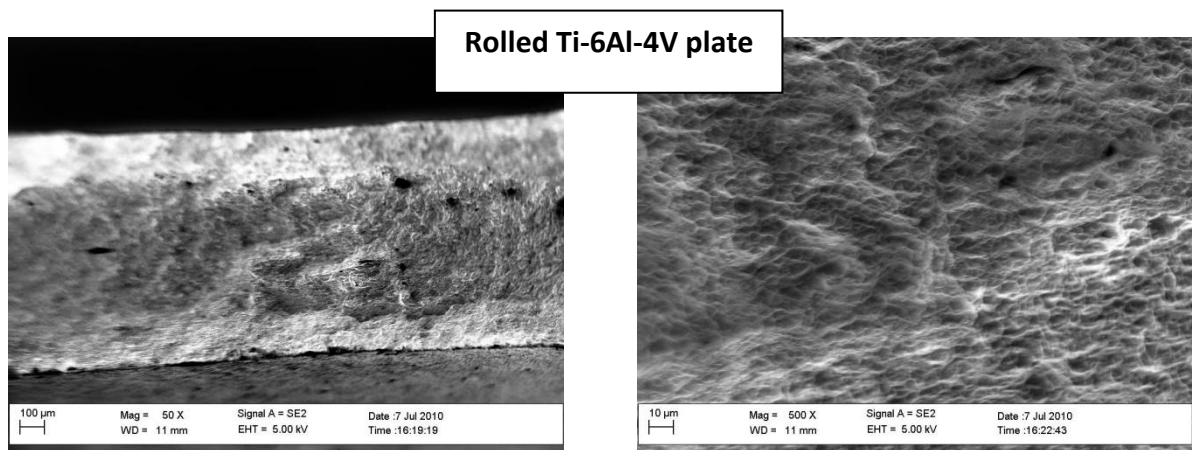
Fracture surface of the rolled Ti-6Al-4V plate after tensile testing
